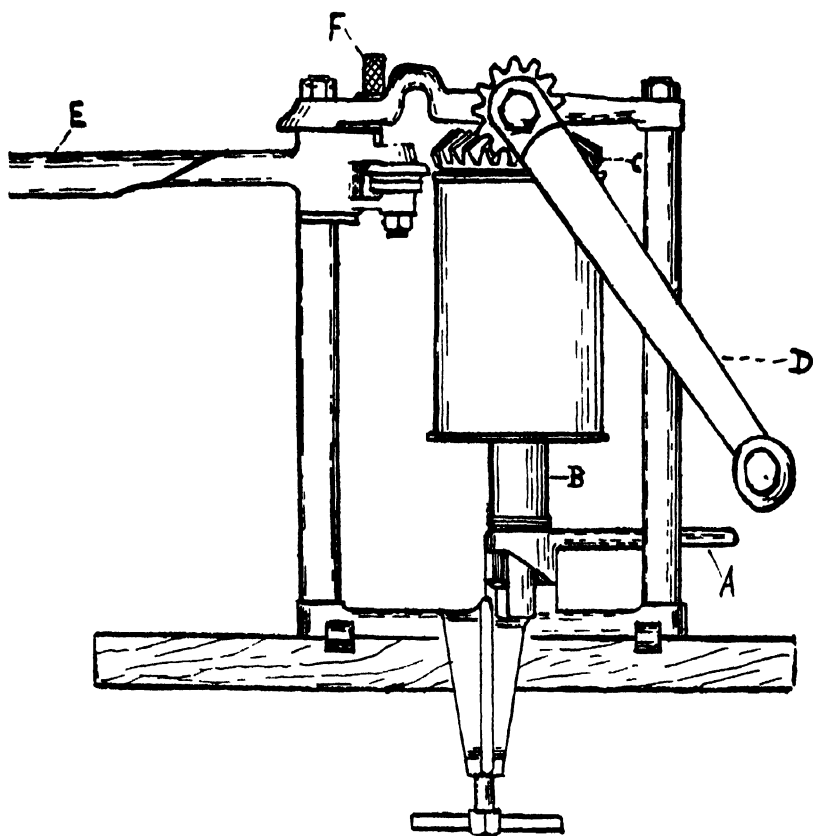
Diagram of Hand Power Can-Sealing Machine, with Can in position for Sealing.
